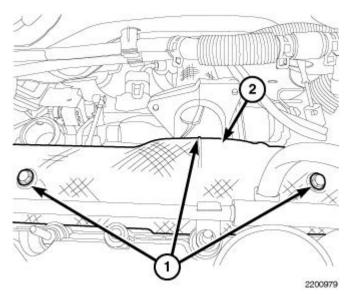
Exhaust Manifold Heat Shield Bolts Courtesy of CHRYSLER LLC
